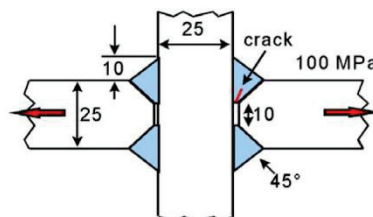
Problem 4 : Root crack in cruciform joint with fillet welds (Hobbacher 2013)
